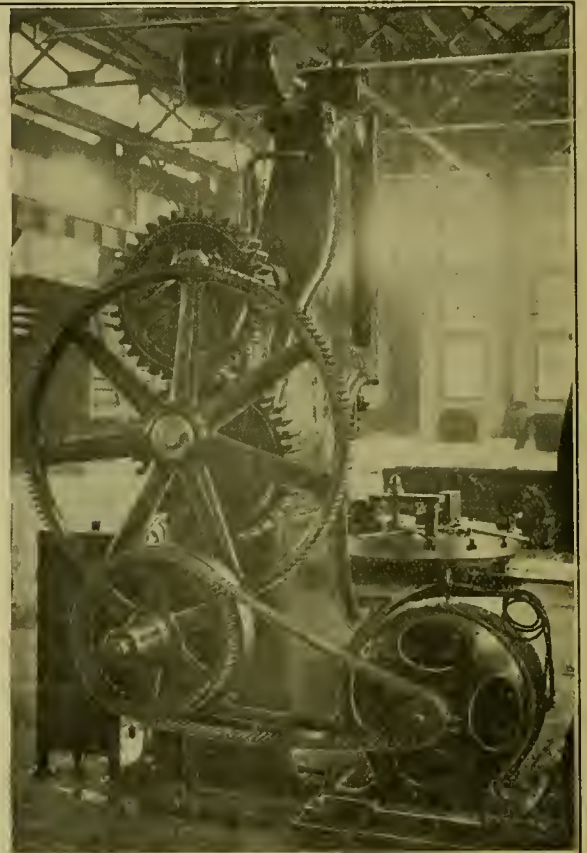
VIEW SHOWING DETAILS OF THE MOTOR-DRIVE ARRANGEMENT.—13-H.P. CROCKER-WHEELER MOTOR.
